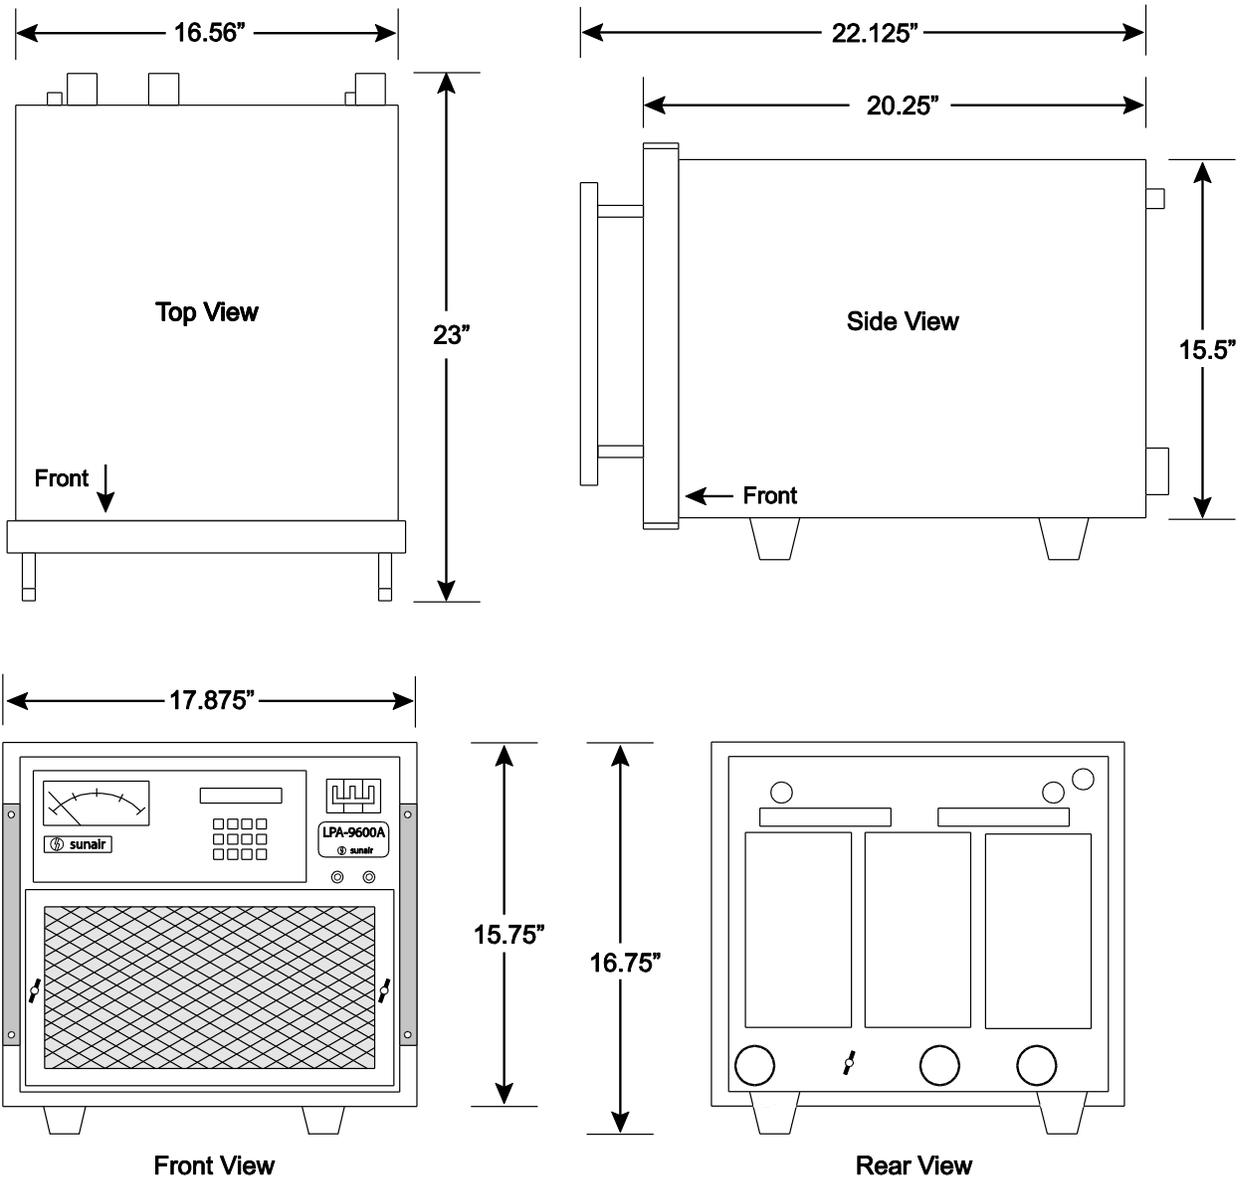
LPA-9600 Outline and Mounting Dimensions
